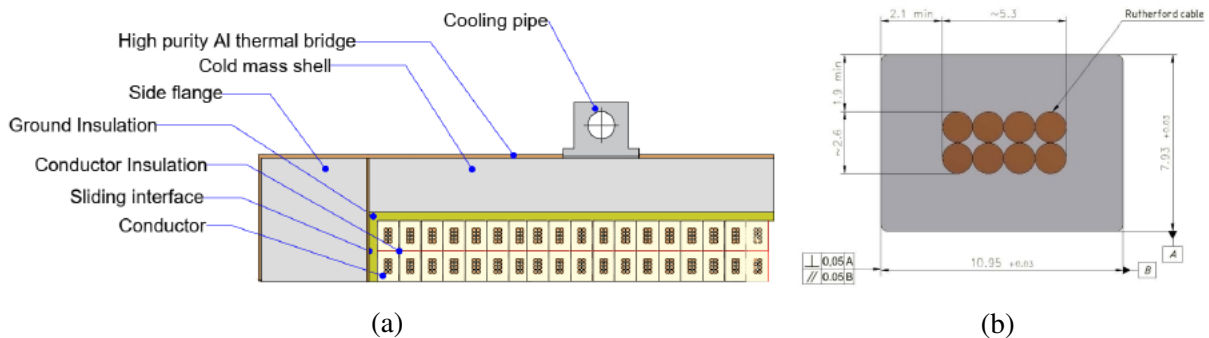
(a) Part of the cold mass cross-section, showing the layout at the end flange. (b) Cross-section of the solenoid conductor, showing the 8 strands of Rutherford cable enclosed by the Al matrix, including sizes and their tolerances.
